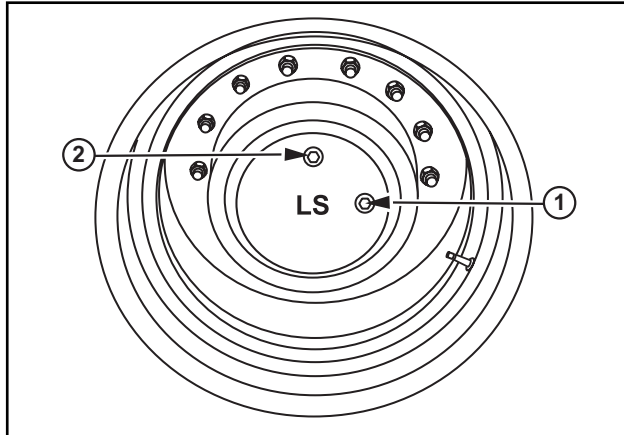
PLANETARY WHEEL ENDS INSPECTION AND FILL PLUGS.
